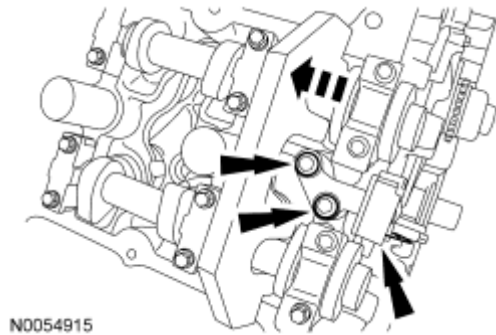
Locating RH Secondary Timing Chain Tensioner Bolts
